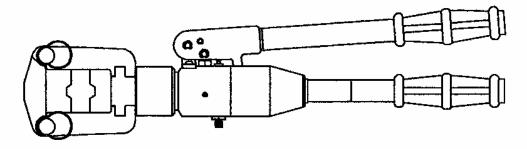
HH80C Hand Actuated Hydraulic Crimp Tool.
